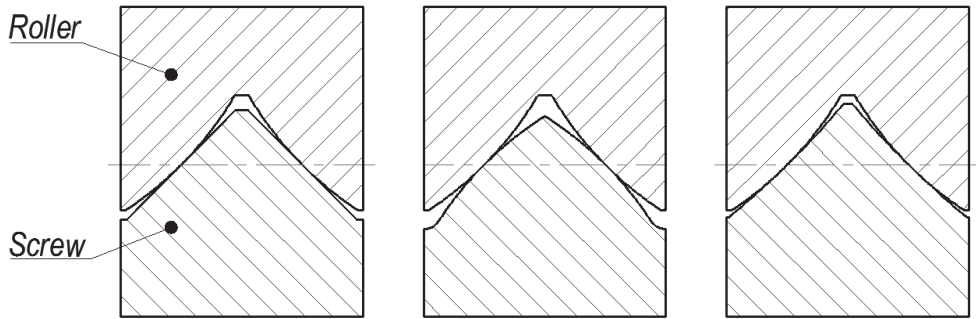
Curvilinear thread profiles of the screw and the roller: a) screw – flat, roller – convex, b) screw – convex, roller – convex c) screw – concave, roller – convex
